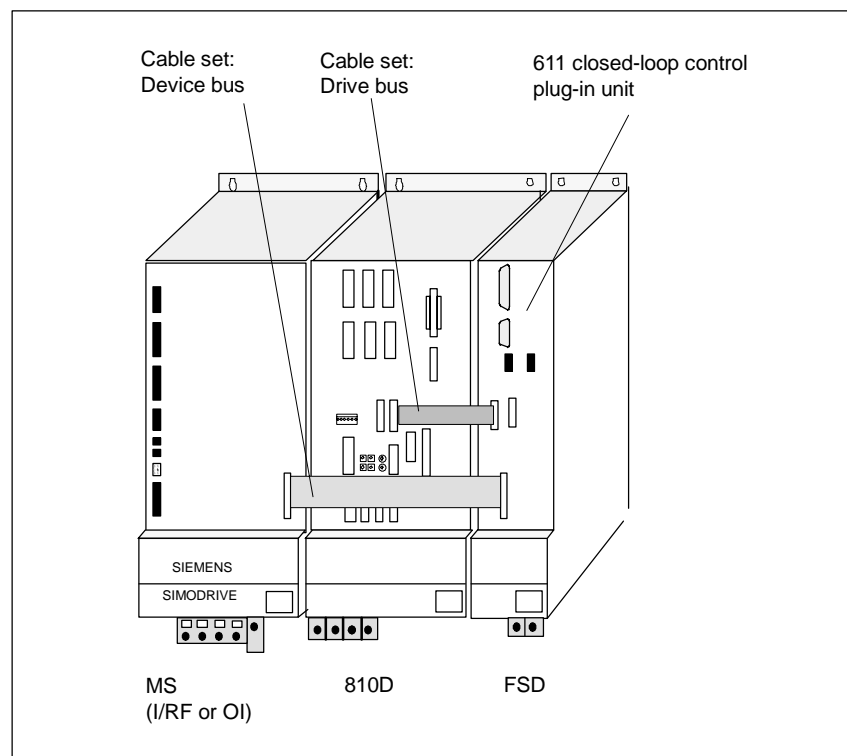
Axis expansion with SIMODRIVE 611 power section and external 611D control
